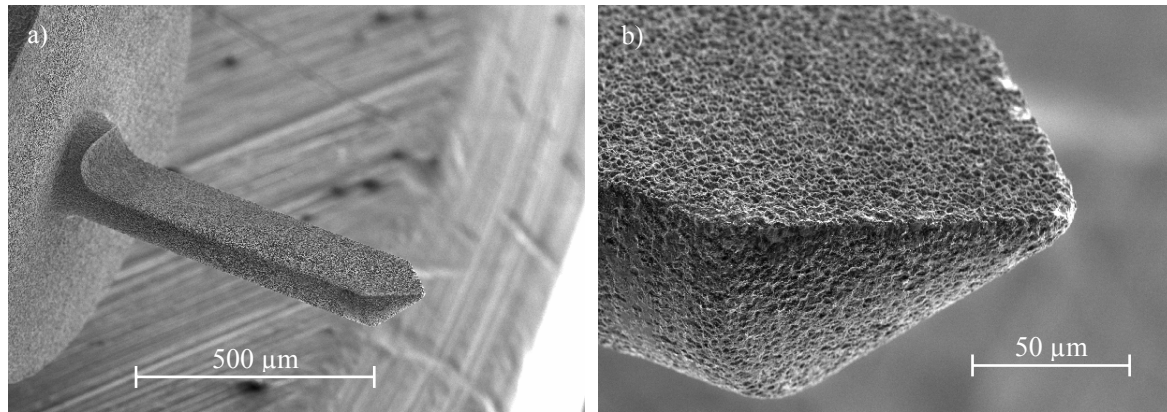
a) PCD tool for drilling holes in brittle materials b) zoomed image of the cutting edge
